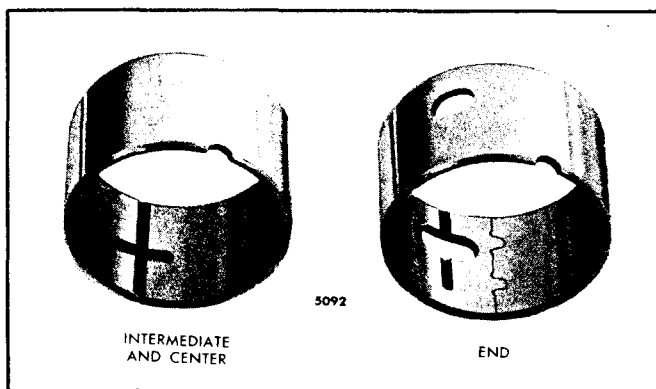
Camshaft and Balance Shaft Bearing Identification
